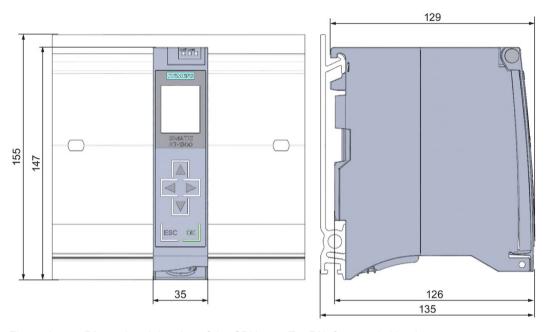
Dimensional drawing of the CPU 1511T-1 PN, front and side view
